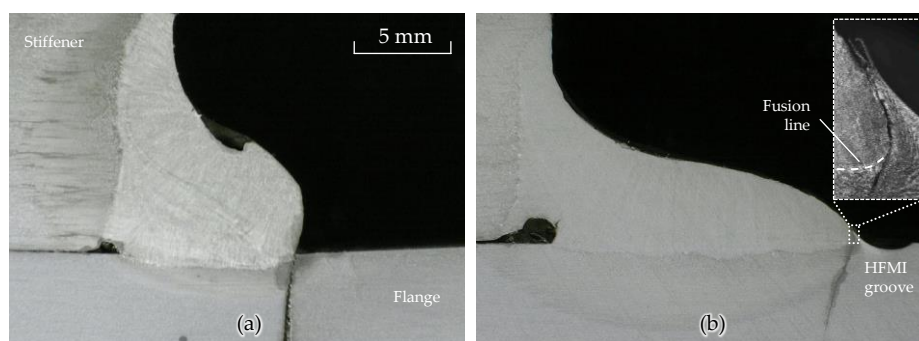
Macro graphs on the failures in the tensile specimens: (a) an EQ70 specimen failing from the weld toe, and (b) a HFMI-treated EQ47 specimen failing from the edge of the HFMI groove in the vicinity of the fusion line.
